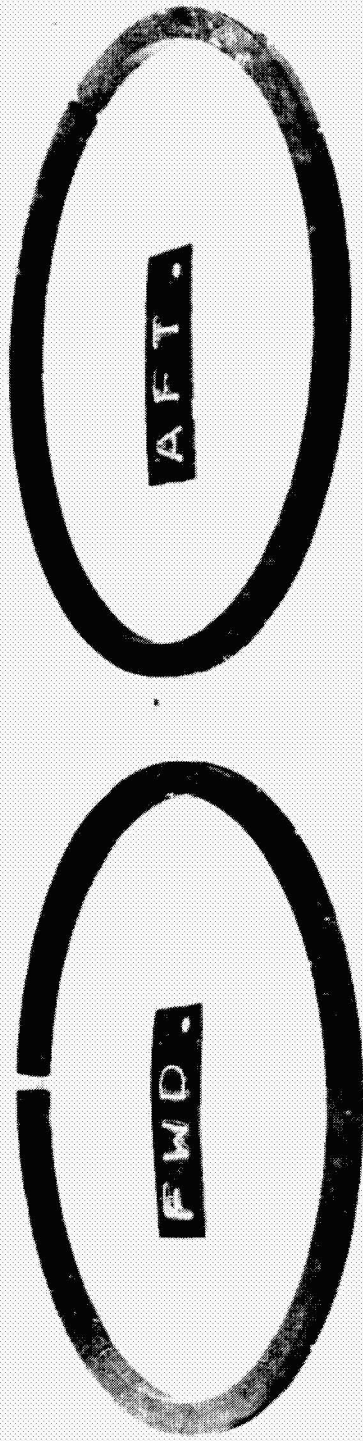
Forward and Aft Piston Rings After Endurance Test, Build II.
